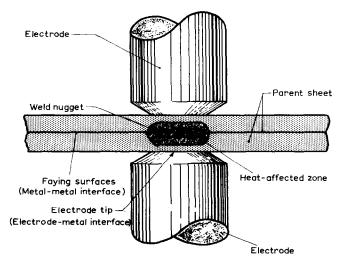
Schematic diagram of a spot weld illustrating terms used in spot-welding.
